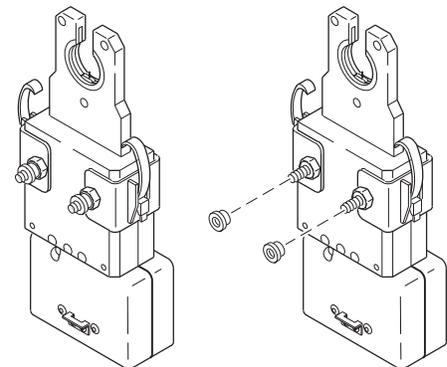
Storing the Thumb Nuts on the Adapter Screws
